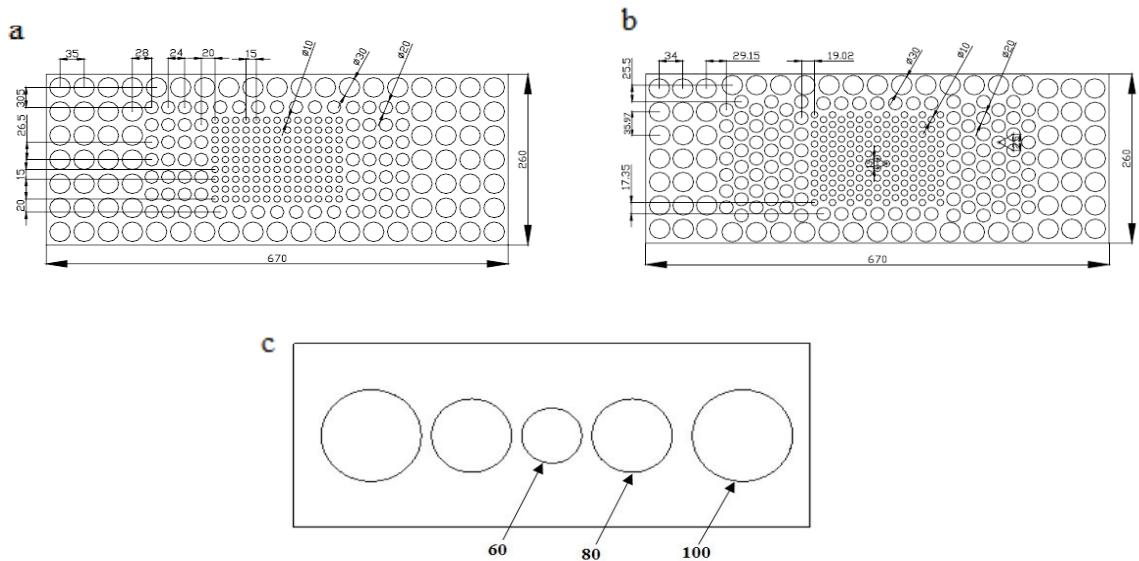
Baffle plate arrangement used in inlet header configuration a) Inline arrangement [3] b) staggered arrangement [3] c) second baffle plate.
